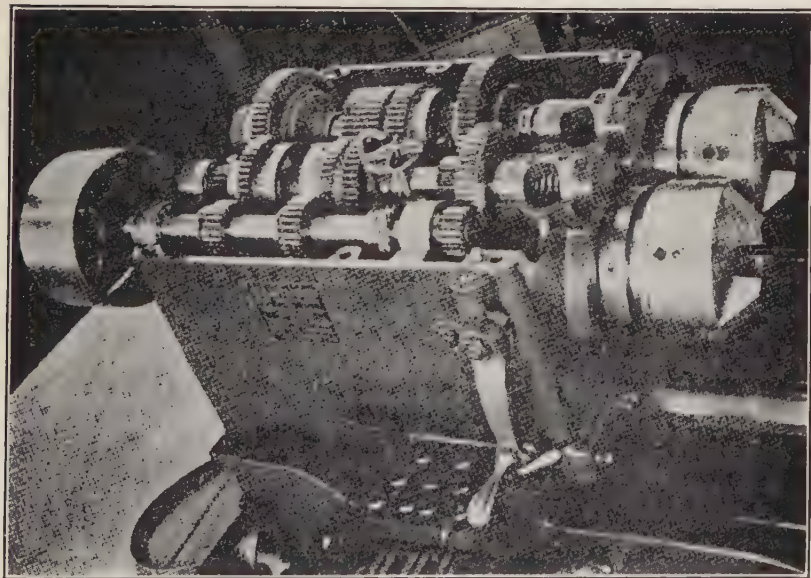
Headstock of Double-Spindle Flat Turret Lathe
